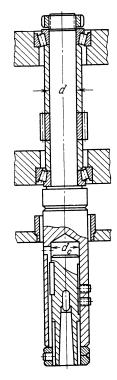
Spindle of a unitbuilt multiple-spindle machine tool
